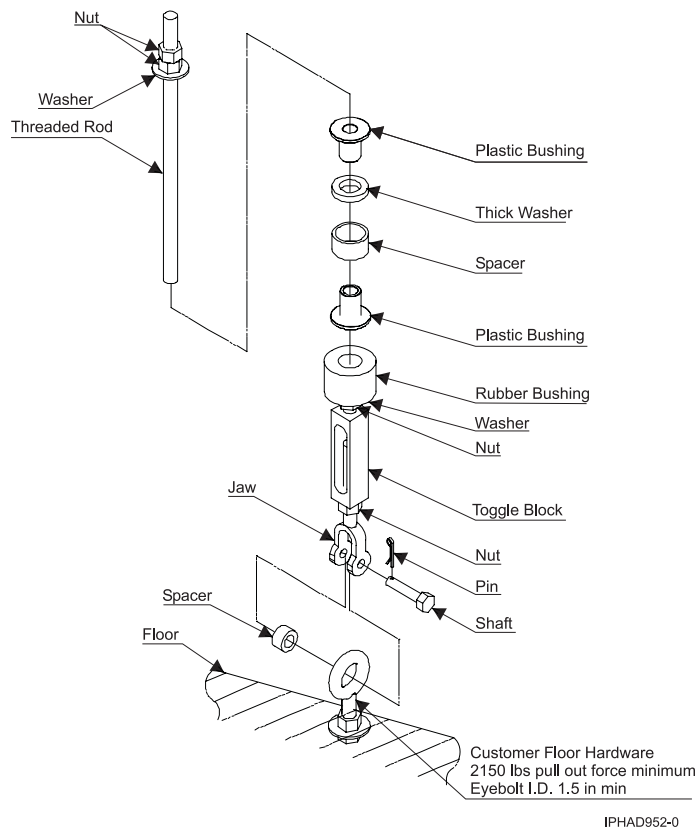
Turnbuckle assembly frame tie-down hardware for 228.6 mm to 330.2 mm (9 in. to 13 in.) raised floor (Part number 44P2999)
